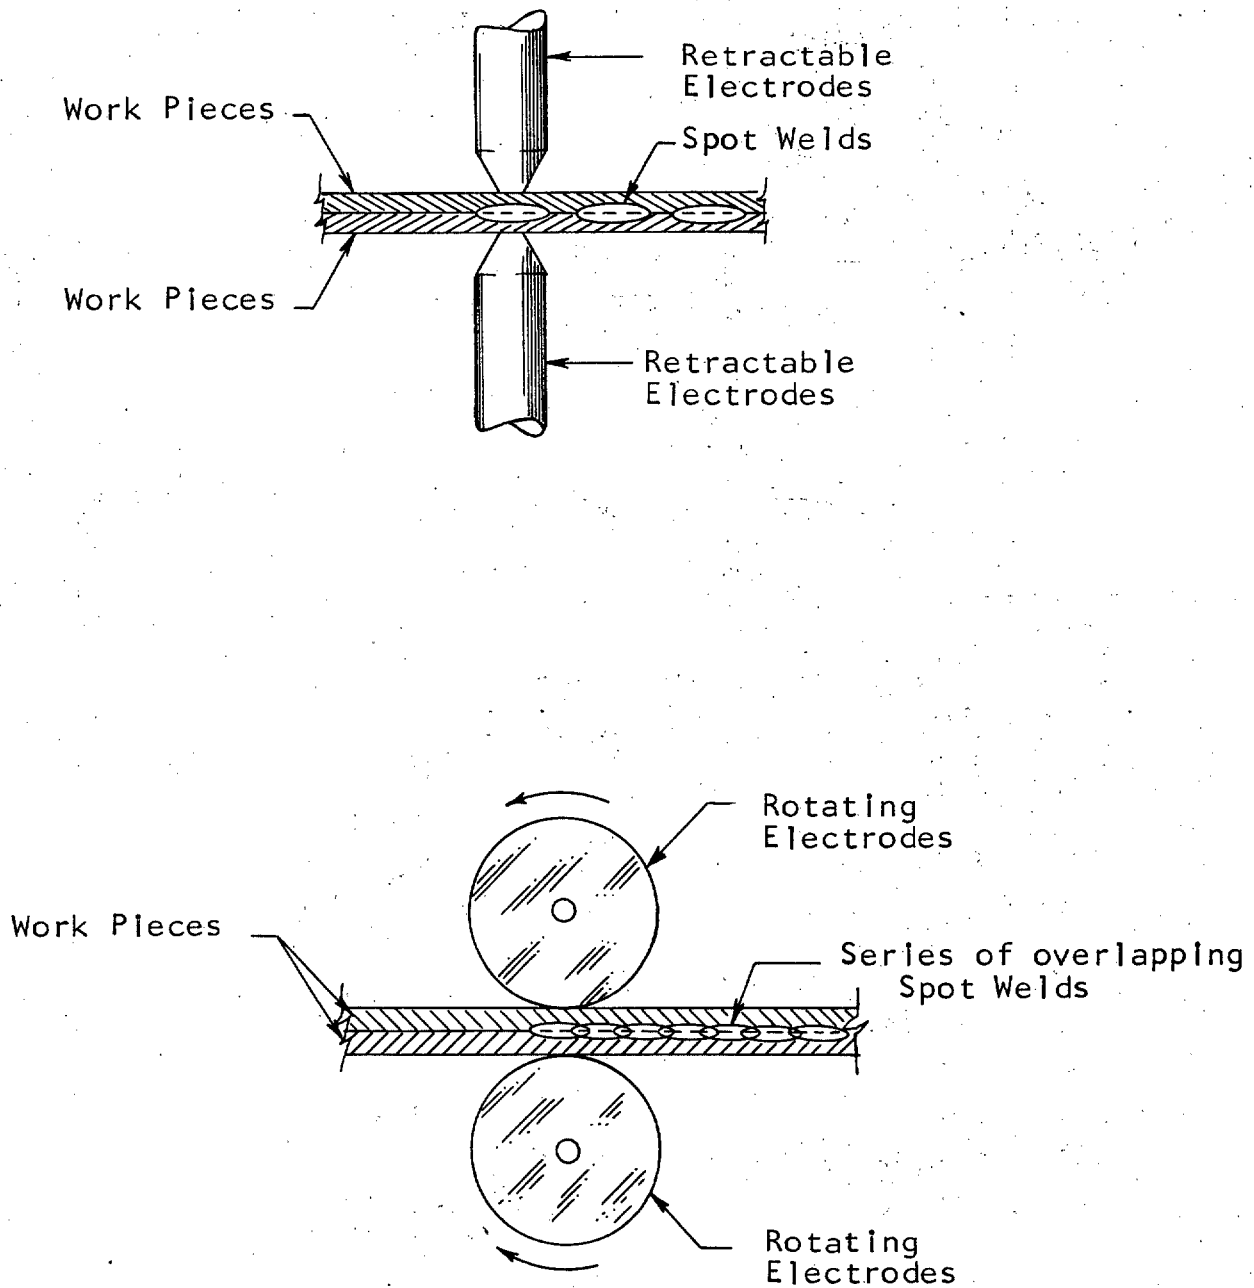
Spot Welding and Seam Welding Processes
